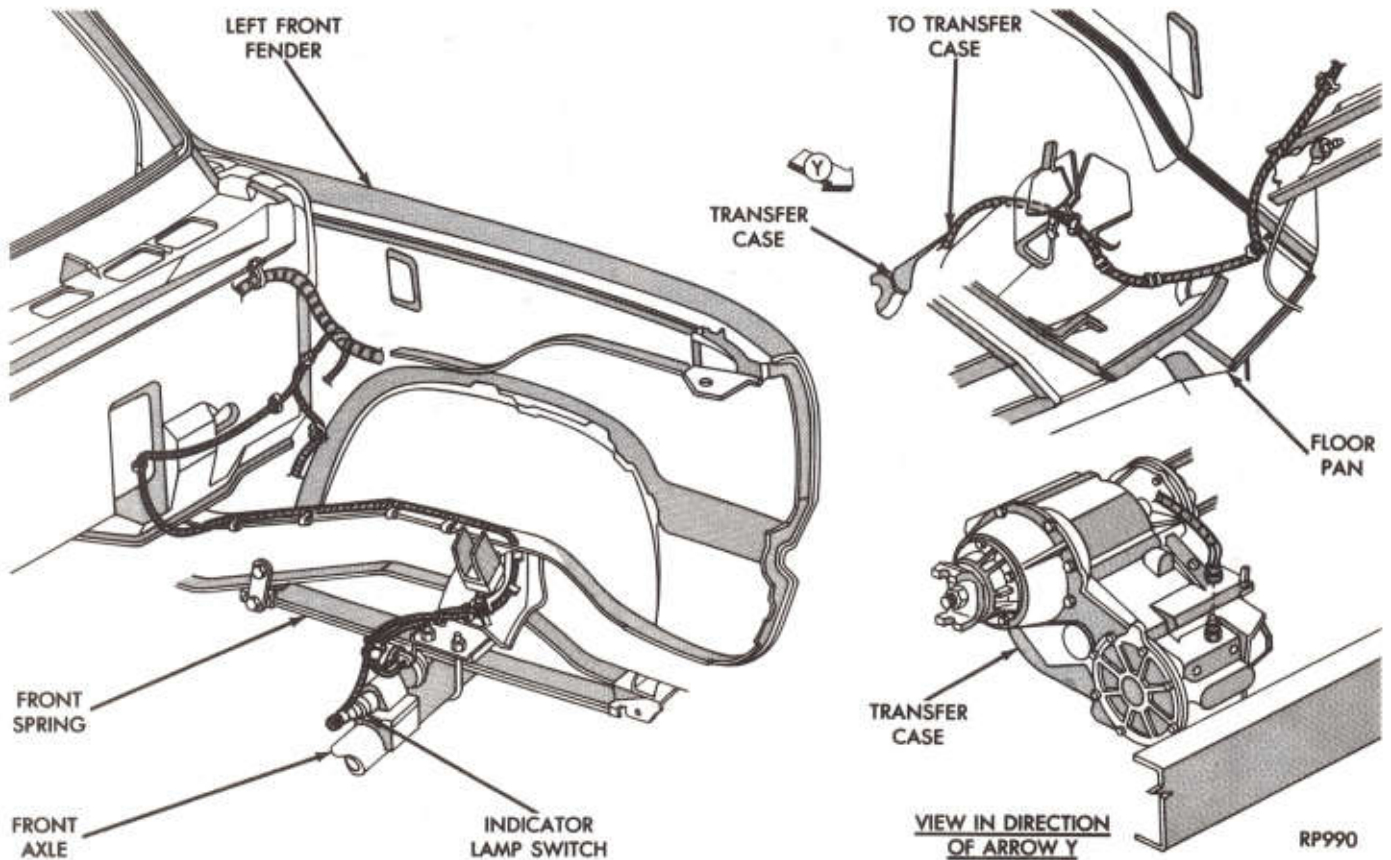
Four-Wheel-Drive Wiring and Component Identification
